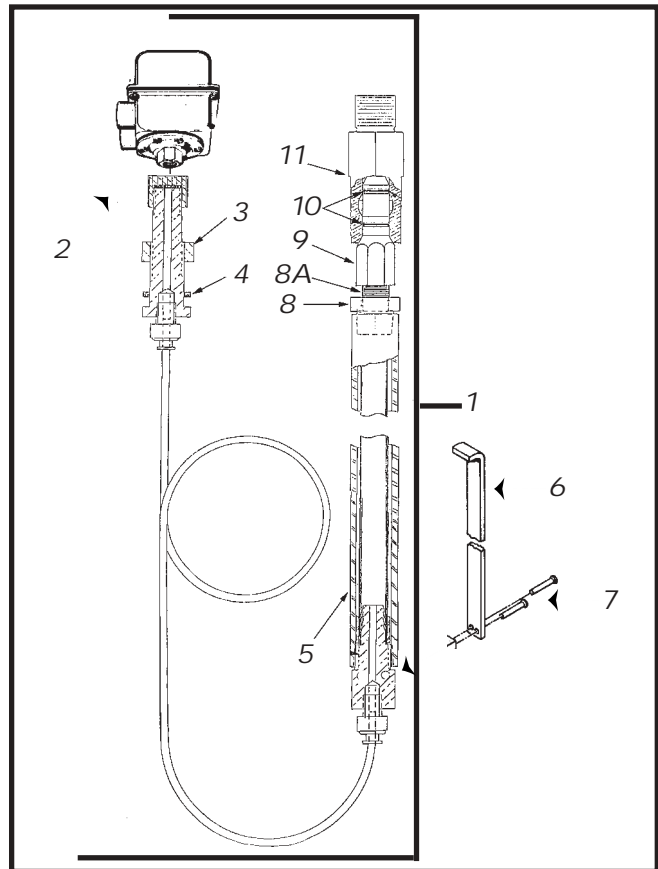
EXPLODED VIEW OF AWRPA CONTROL KIT
